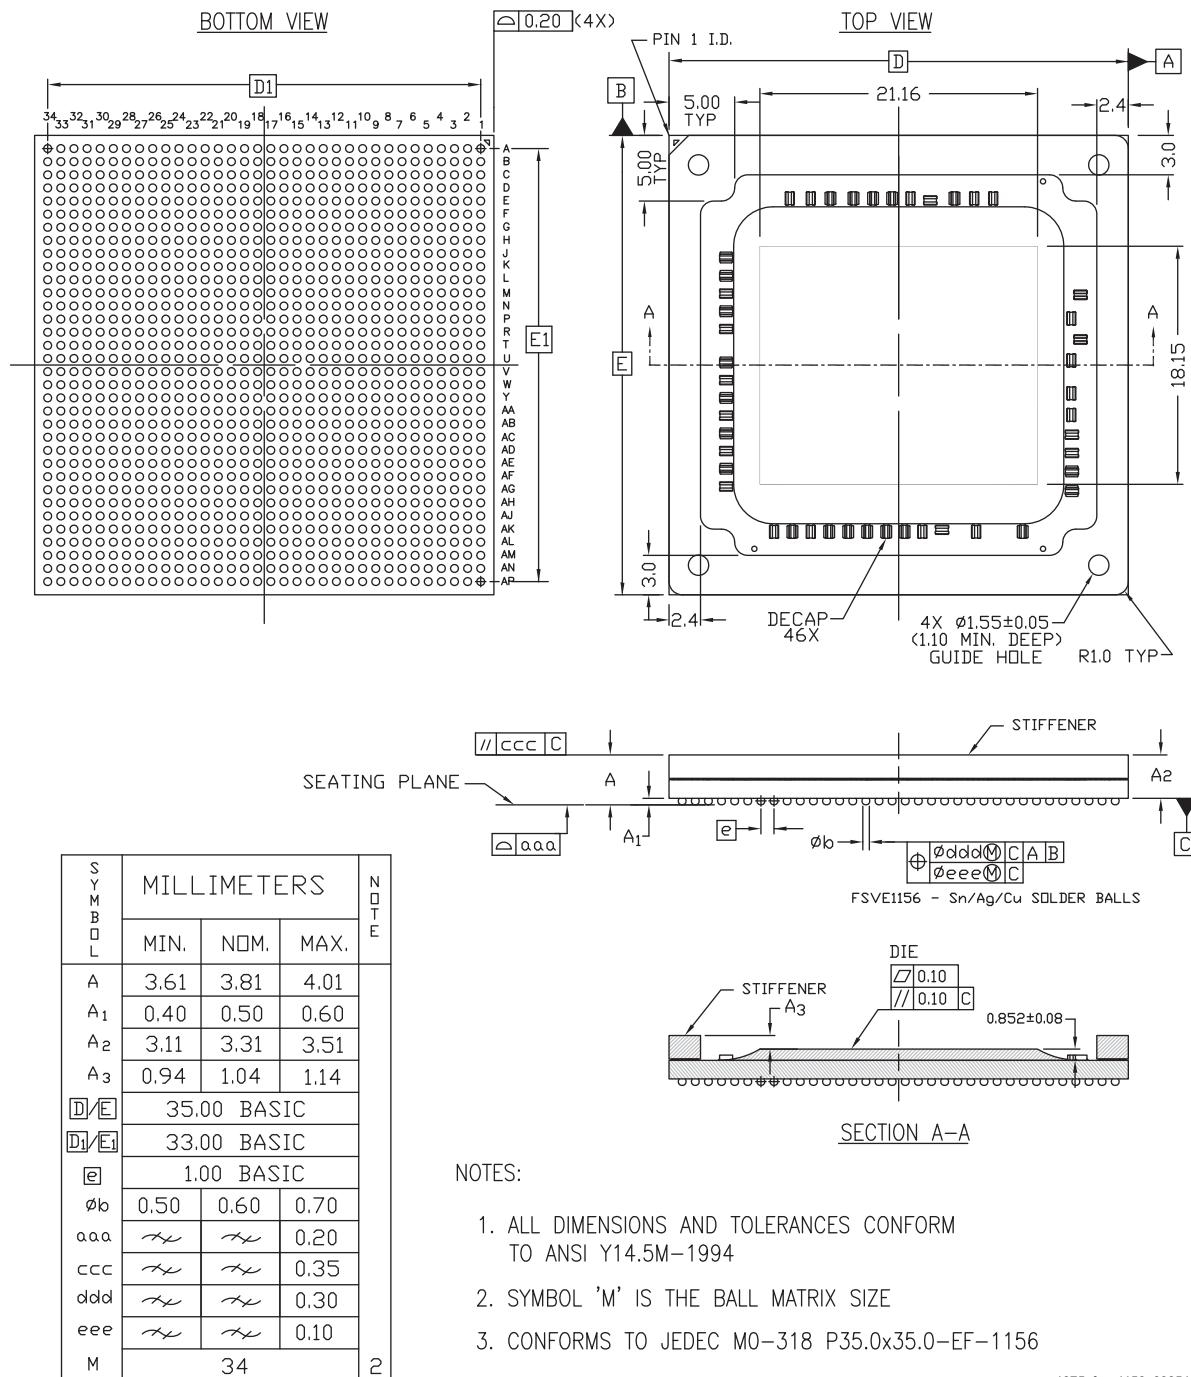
Package Dimensions for FSVE1156 (XCZU25DR, XCZU27DR, and XCZU28DR)
